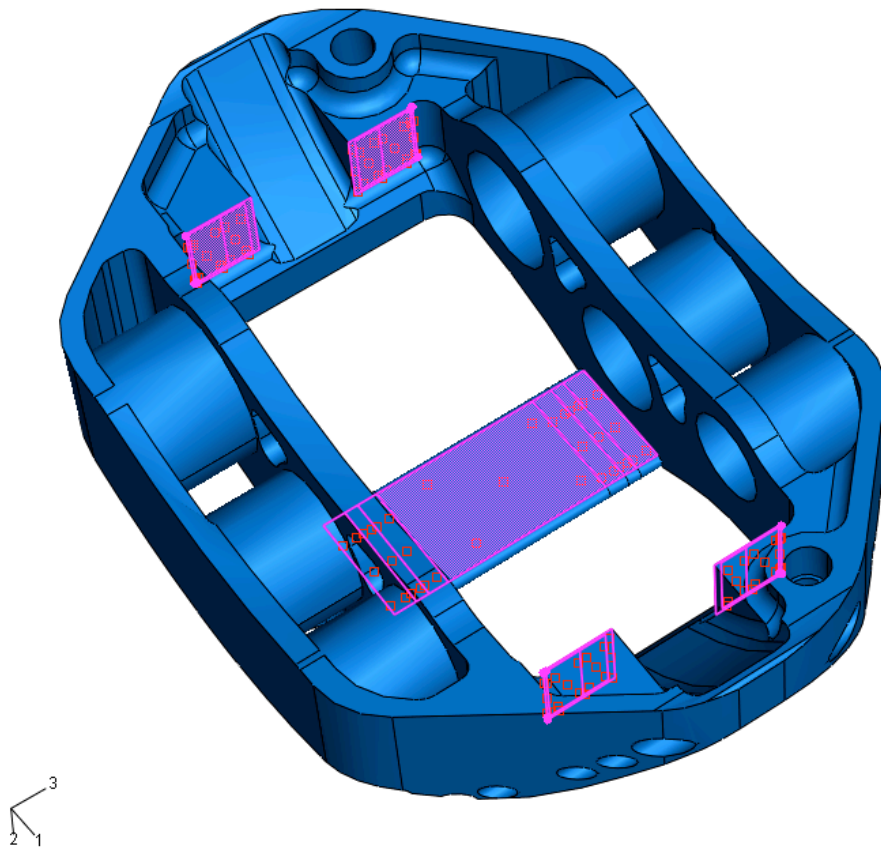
Six pot caliper, pad/calipercontact surfaces
